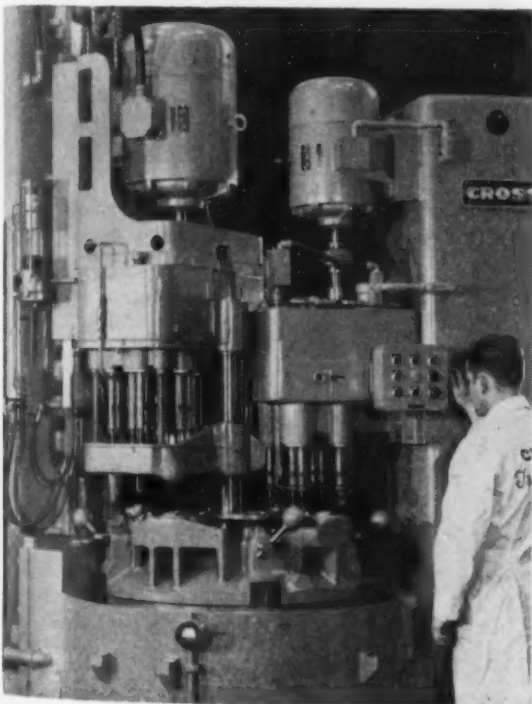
Dial or indexing-type machine is shown here. The number of stations is limited in this type machine; also, the part is generally small such as flywheel shown.
